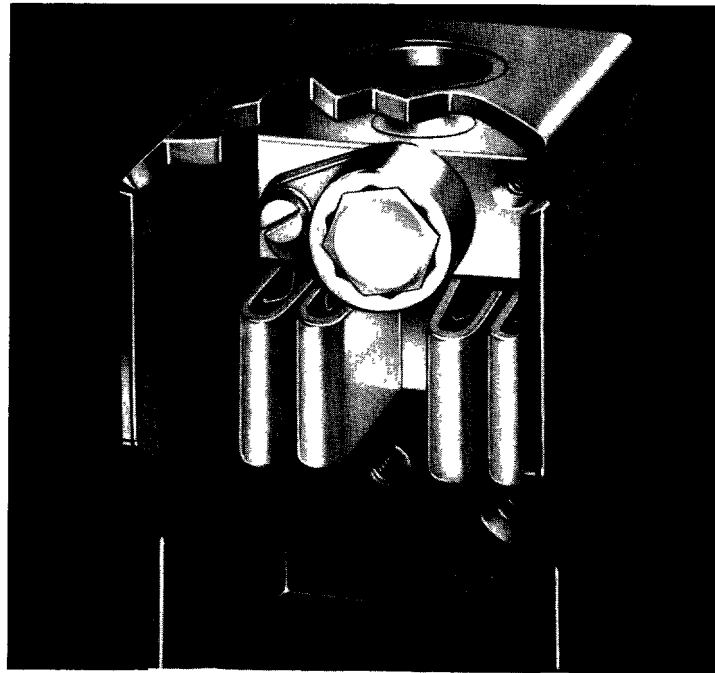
Front connected 200 amp 'Red Spot' fuse base with shroud removed and with moulding partly cut-away to show silver plated base contact and terminal screw locking device
